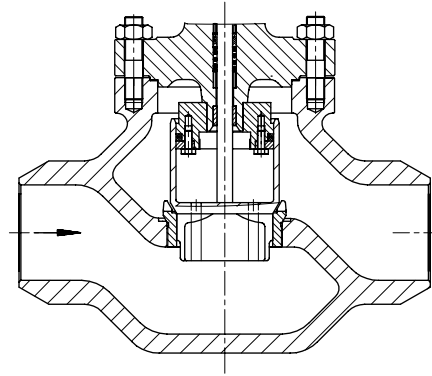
· Type 3251 Valve with welding ends and balanced valve plug
